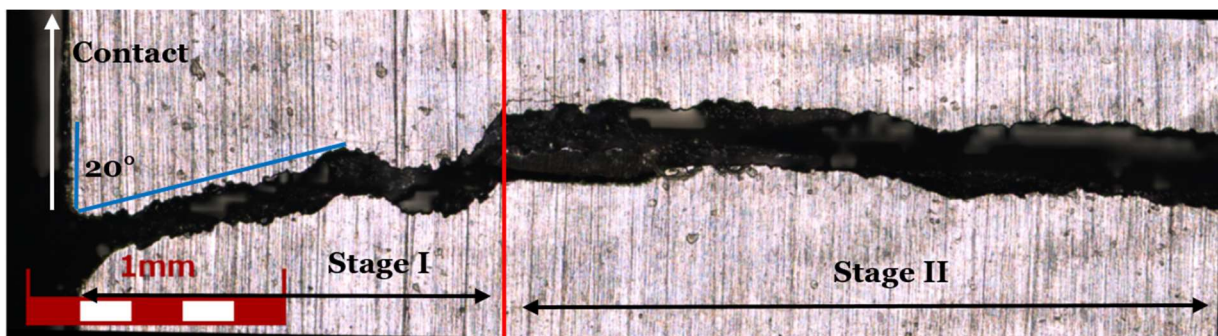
Angle of crack initiation and direction of further crack propagation for the 8mm specimen and test with pad radius  $R=50\text{mm}$ .
